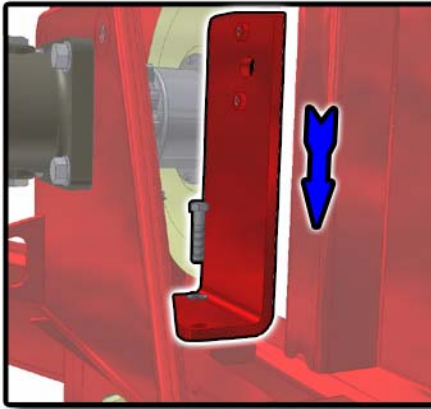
Install Brake Caliper Bracket (Parts removed for clarity)
